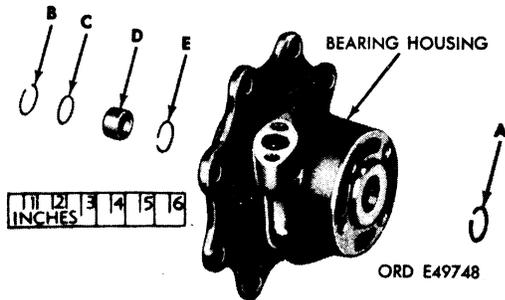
REMOVING OR INSTALLING RETAINING RINGS, SLEEVE BEARING, AND THRUST WASHER - TURBOCHARGER 7748900.
